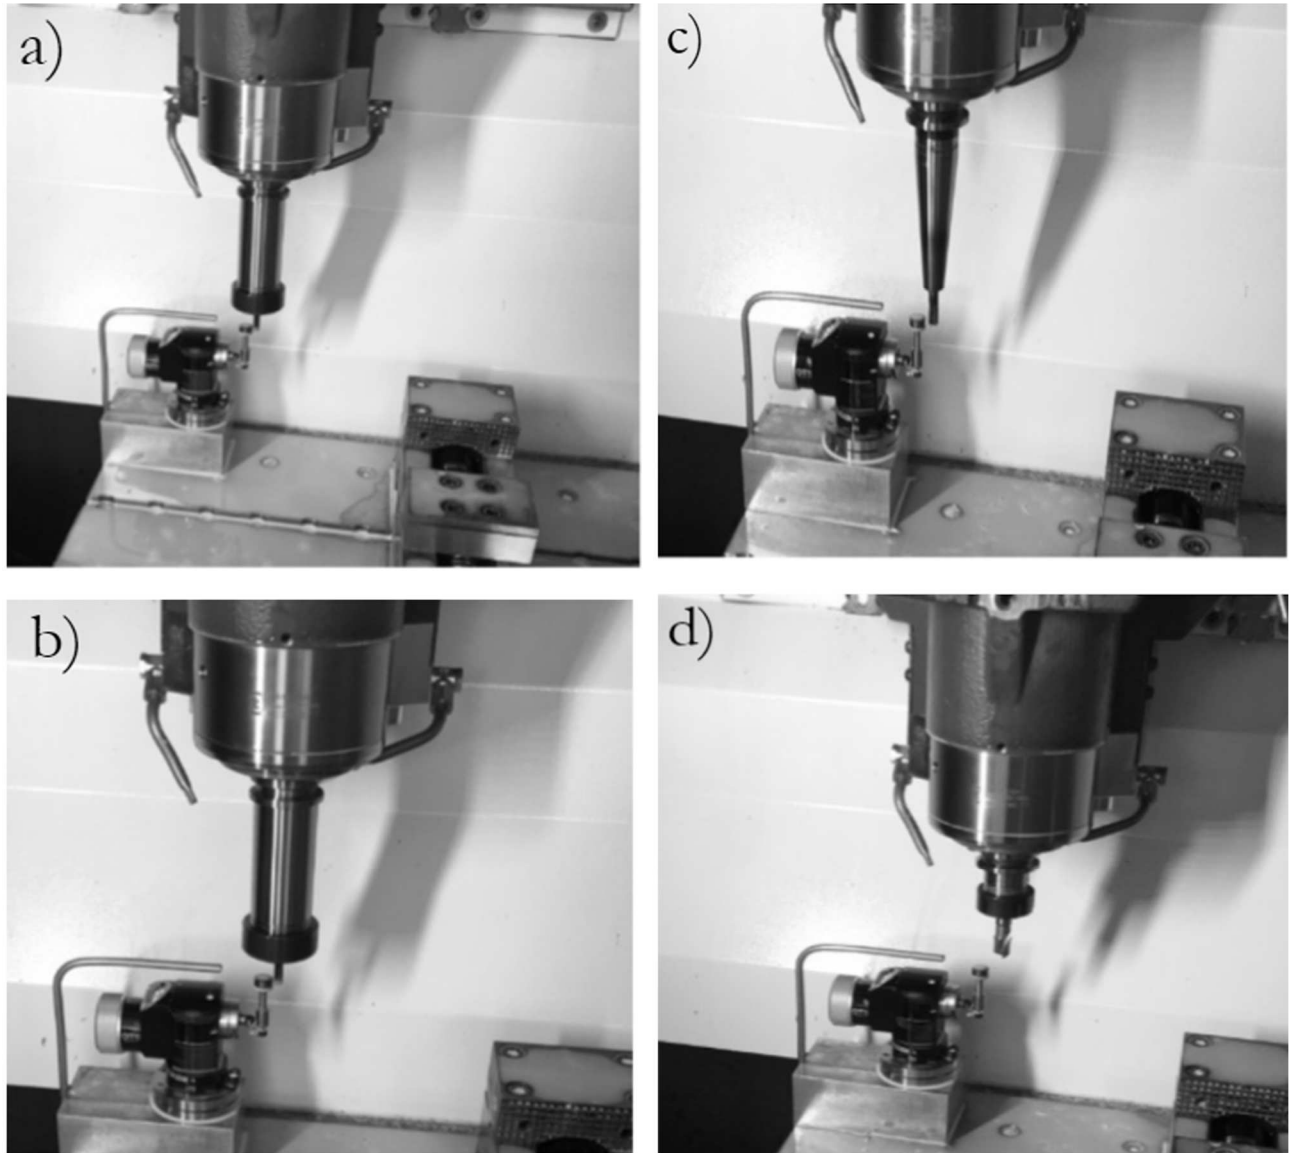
Measurement of the machining tool nominal radius made with the OTS probe: a) milling cutter with $r_f = 3$ mm, b) milling cutter with $r_f = 4$ mm, c) milling cutter with $r_f = 5$ mm, d) milling cutter with $r_f = 7$ mm
